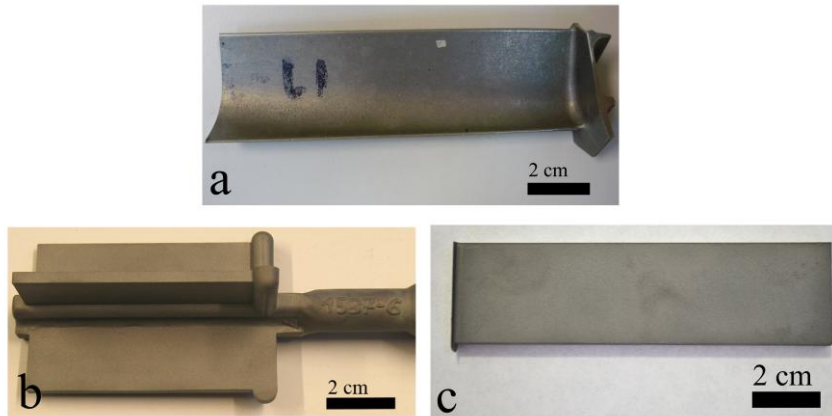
Ti4522XD cast samples: (a) CC-LPT blade and (b, c) rectangular centrifugal castings (CC).
